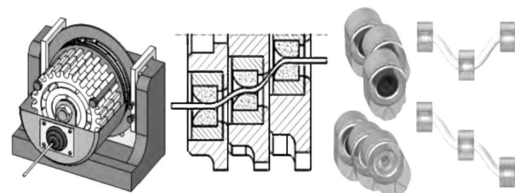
Repeated angular accumulative drawing (Accumulative Angular Drawing process - AAD) [35].
